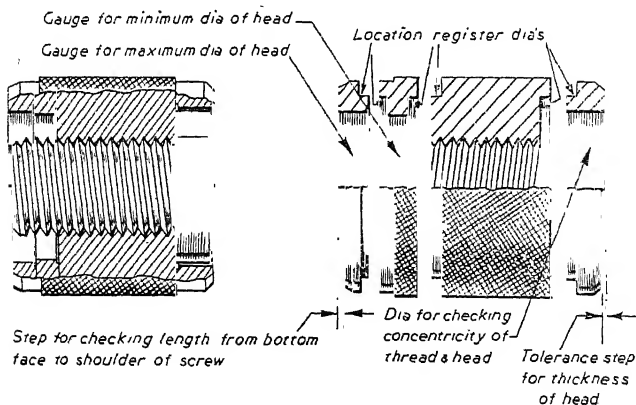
Combination gauge for checking length of thread diameter, thickness and concentricity of head with thread, acceptance of thread diameters and overall length.
